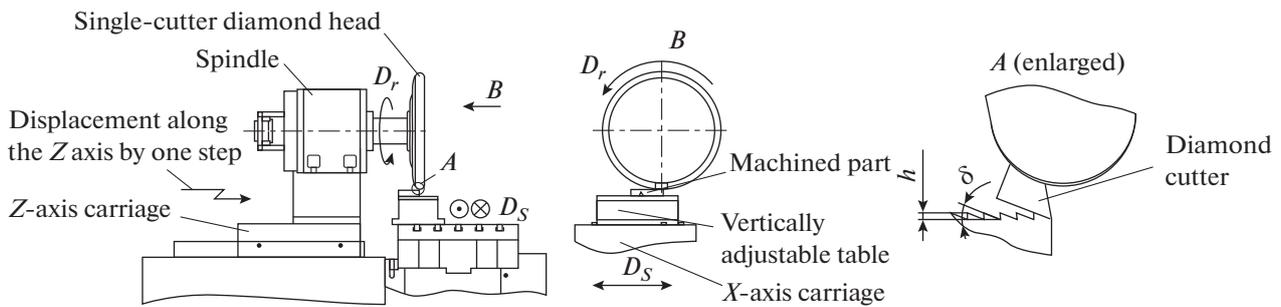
Machining system for matrices used in the manufacture of Fresnel prisms.
